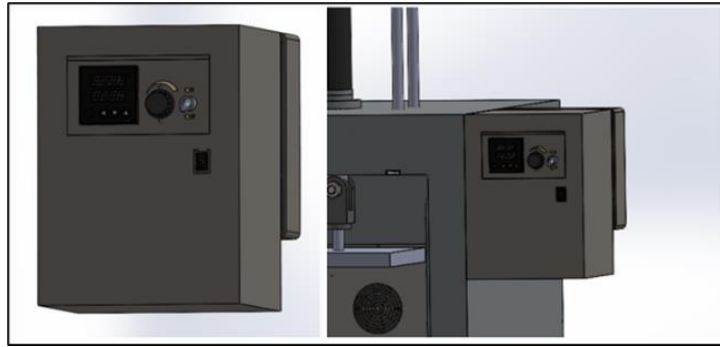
Arrangement of the Control Box Unit Installed in the Machine Frame and Casing
